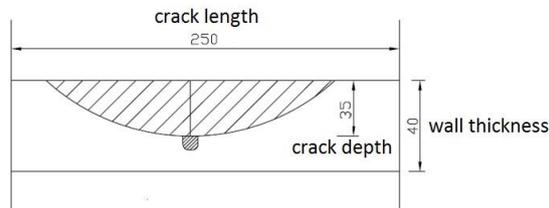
Crack dimensions on one weld in the vessel
